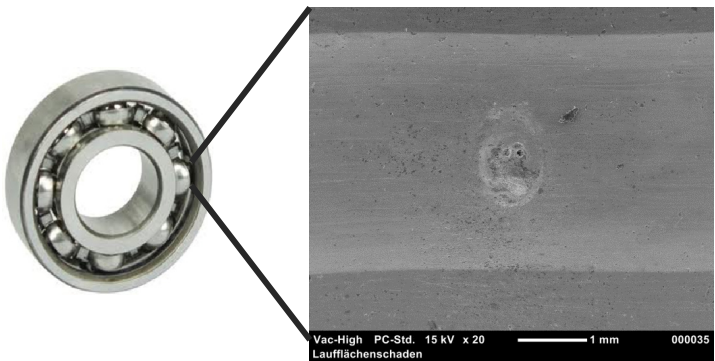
Roller bearing type 6000 (left) and generated damage on the outer ring (Damage type III)
